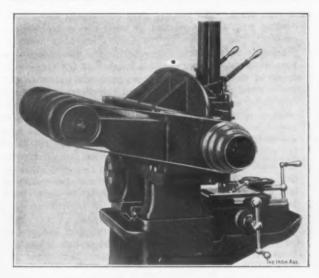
A Detail Side View Showing the Spindle Drive.
